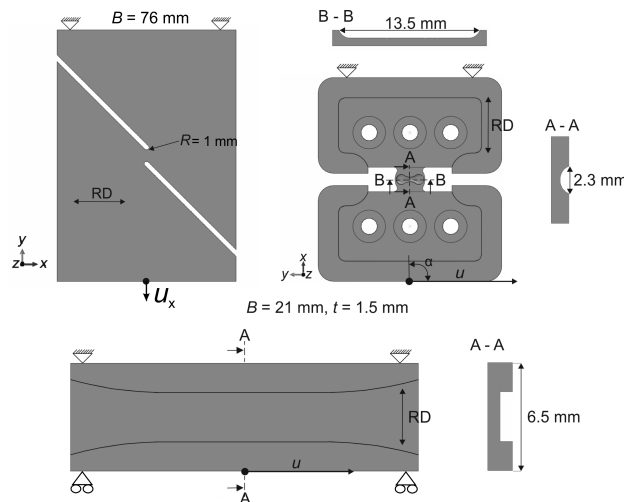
FE models of the in-plane shear tests on the ASTM-type specimen (top left), modified Miyauchi specimen [15] (bottom) and IFUM butterfly specimen with tools (top right)
